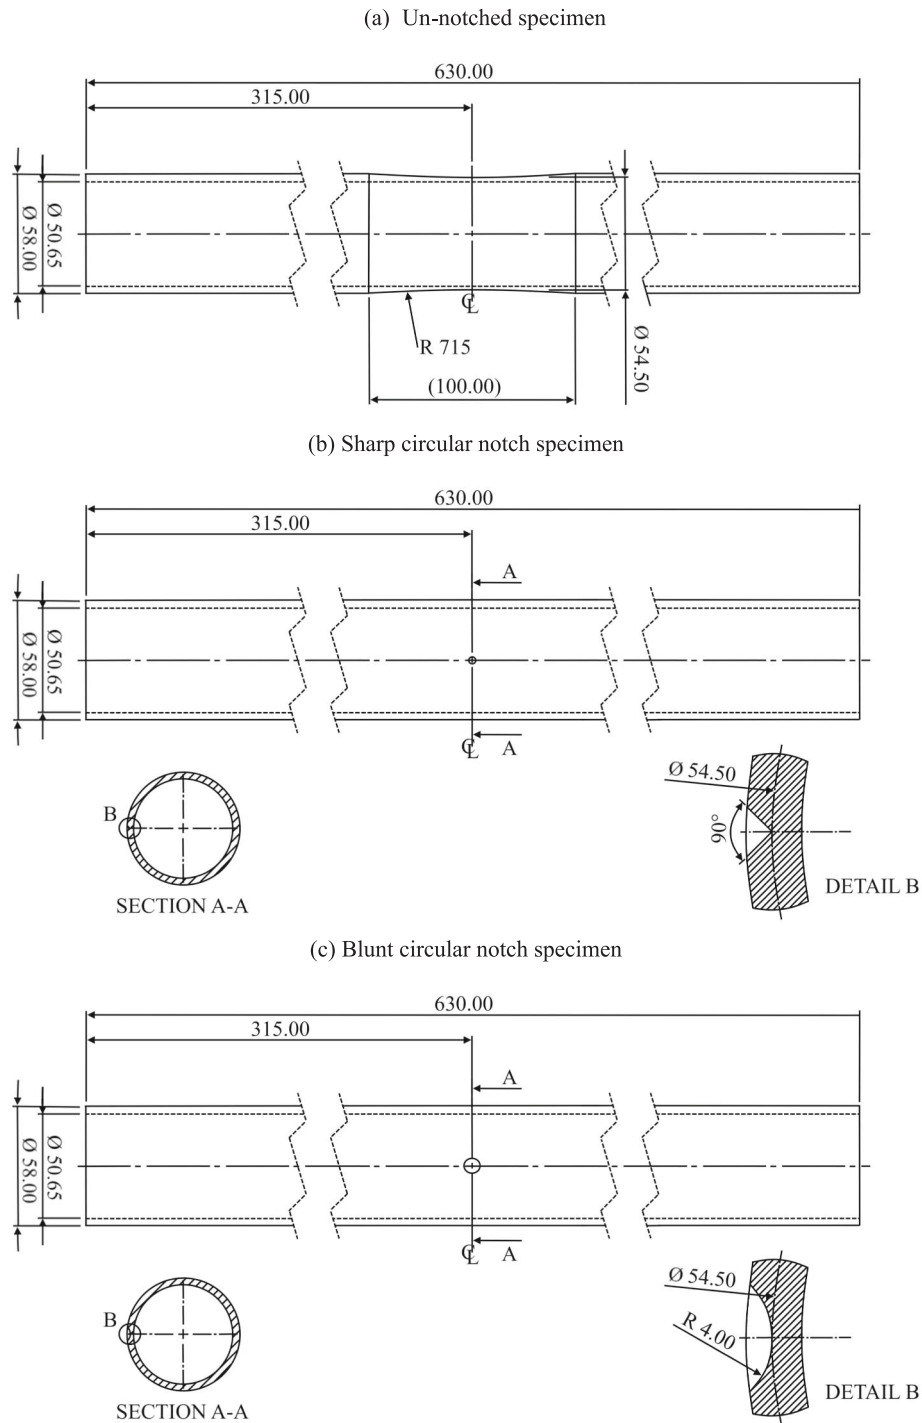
Dimensions of the fatigue specimens used in the bending and biaxial fatigue tests.
